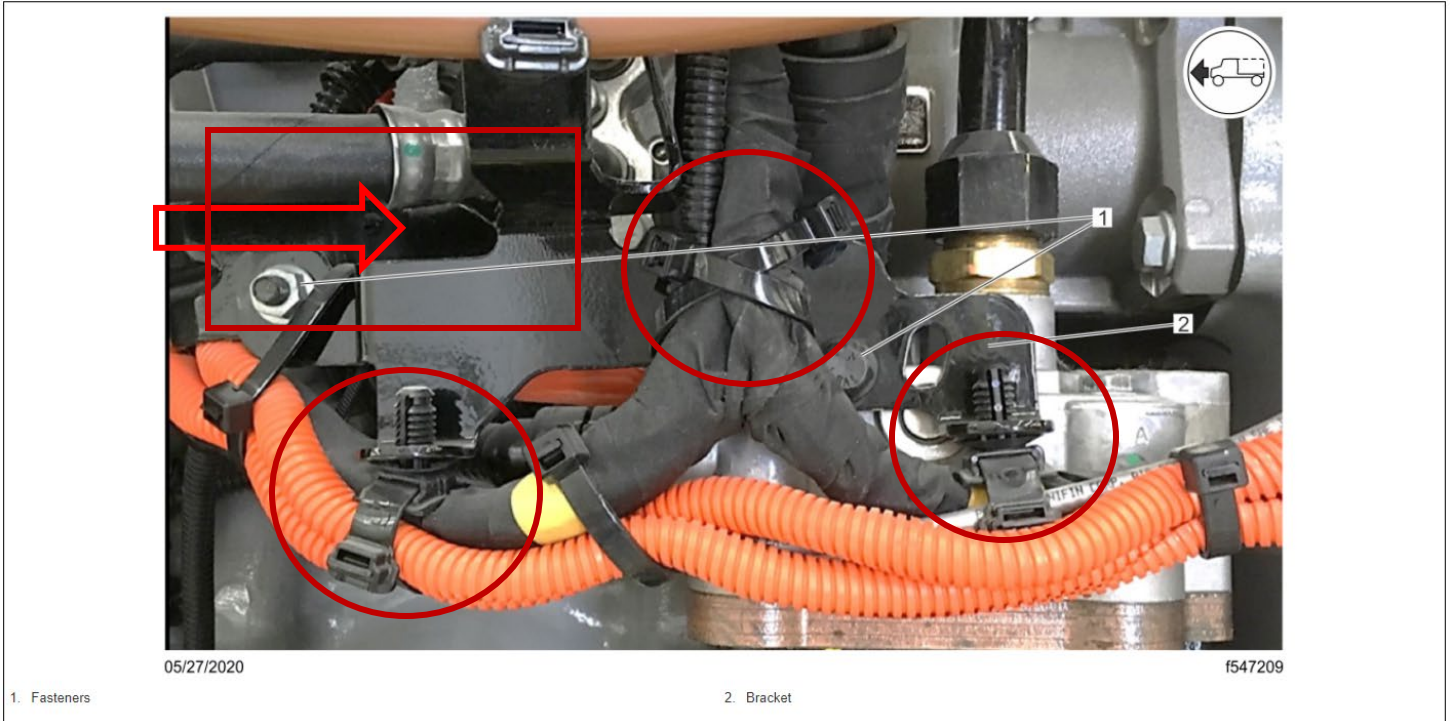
, Engine Harness Routing Showing Tie Straps to Remove and Area of Reduced Clearance
